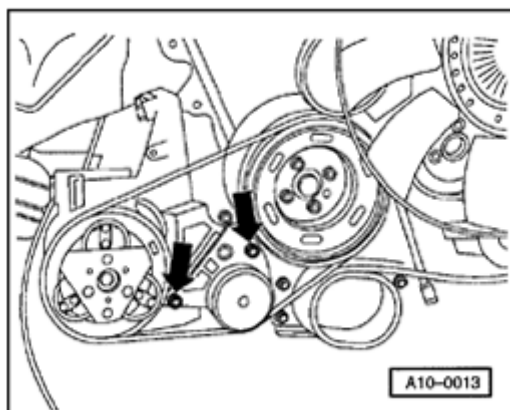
Locating Securing Bolts For Ribbed Belt Tensioner For A/C Compressor
